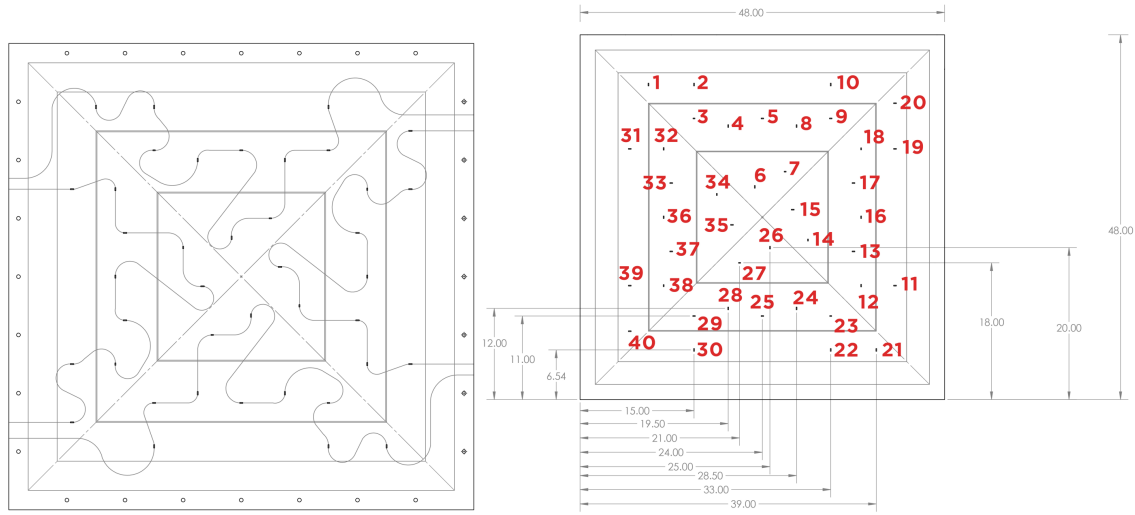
Sensor layout (left) and naming convention and placement measurements, in inches (right)
